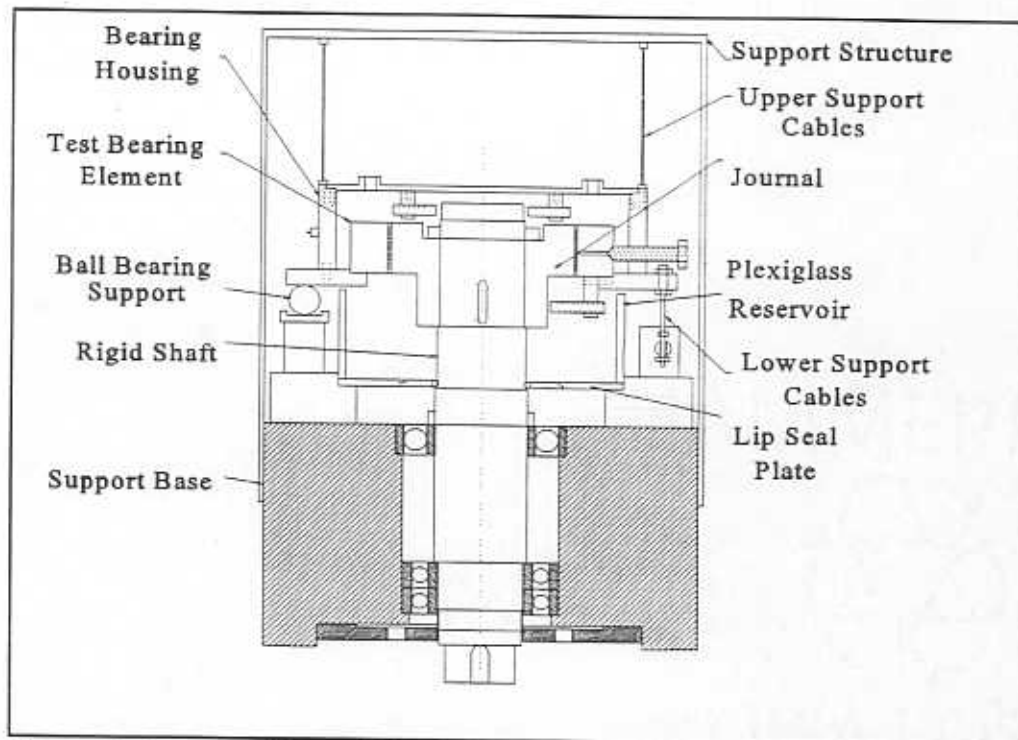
Cut-away View of the Fluid Bearing Test Rig
